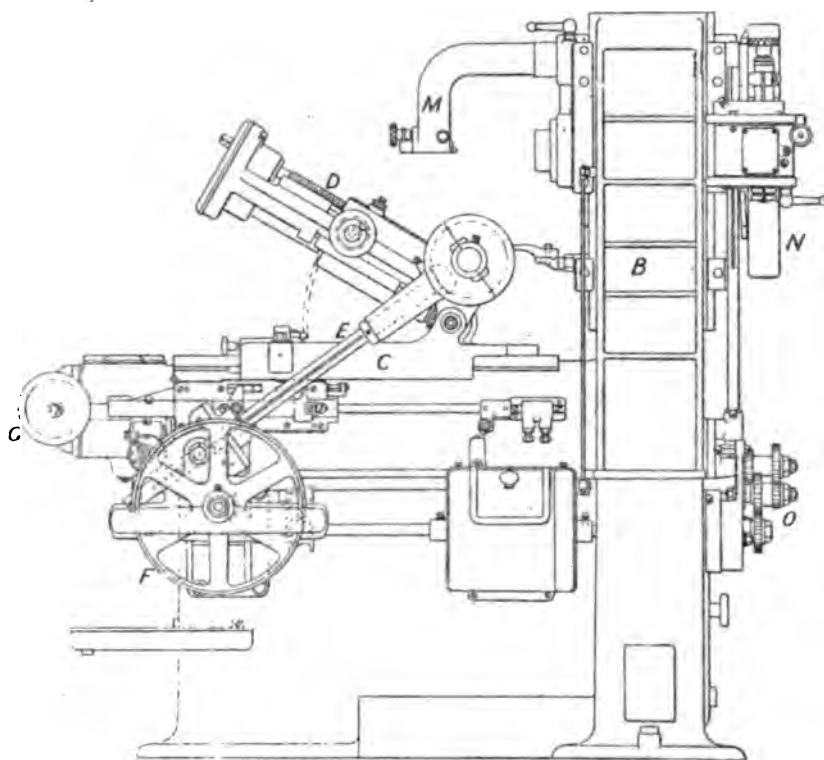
Rear Elevation of Gear Cutting Machine.
